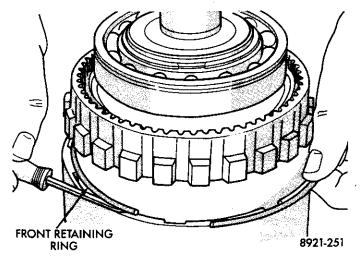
Removing/Installing Clutch Drum Front Retaining Ring
